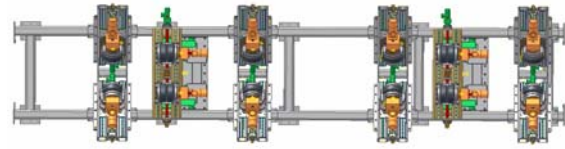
Line for positioning/orientation and technological motion for pipe welding.
